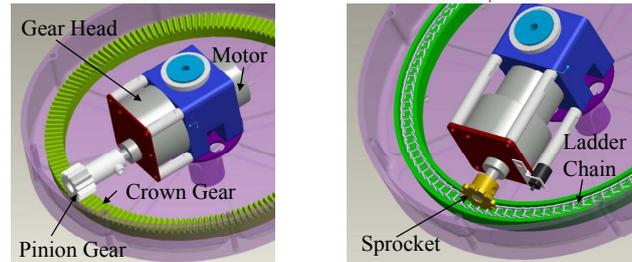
Single stage reducer: pinion gear and crown gear (left), sprocket and ladder chain (right)
